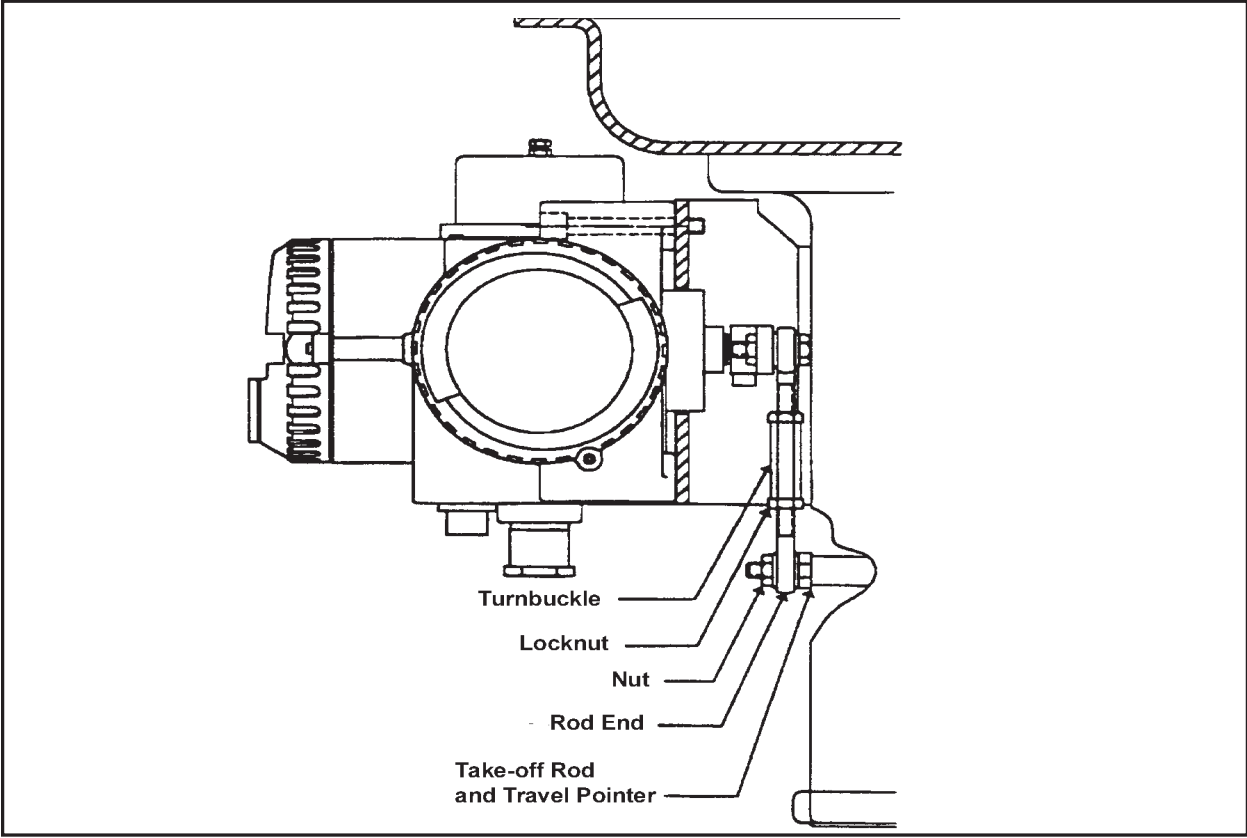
Side View of SVI Mounted on a Reciprocating Valve
